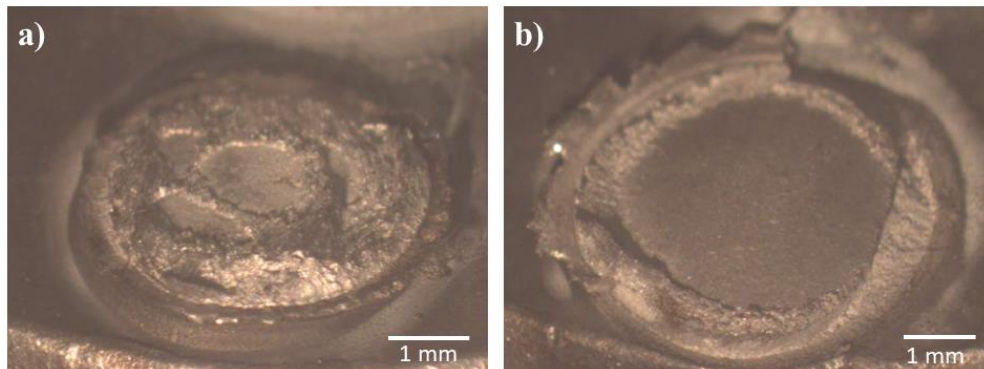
Two weld nugget macrographs that have failed.
